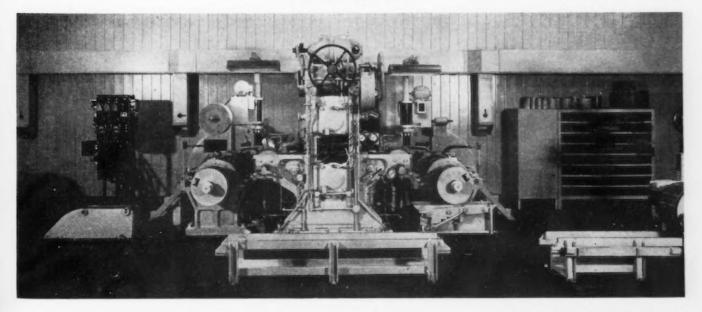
A Cold Metal 7-in. cold strip demonstration mill with the gear case in the background, the main drive motor being out of sight. The
